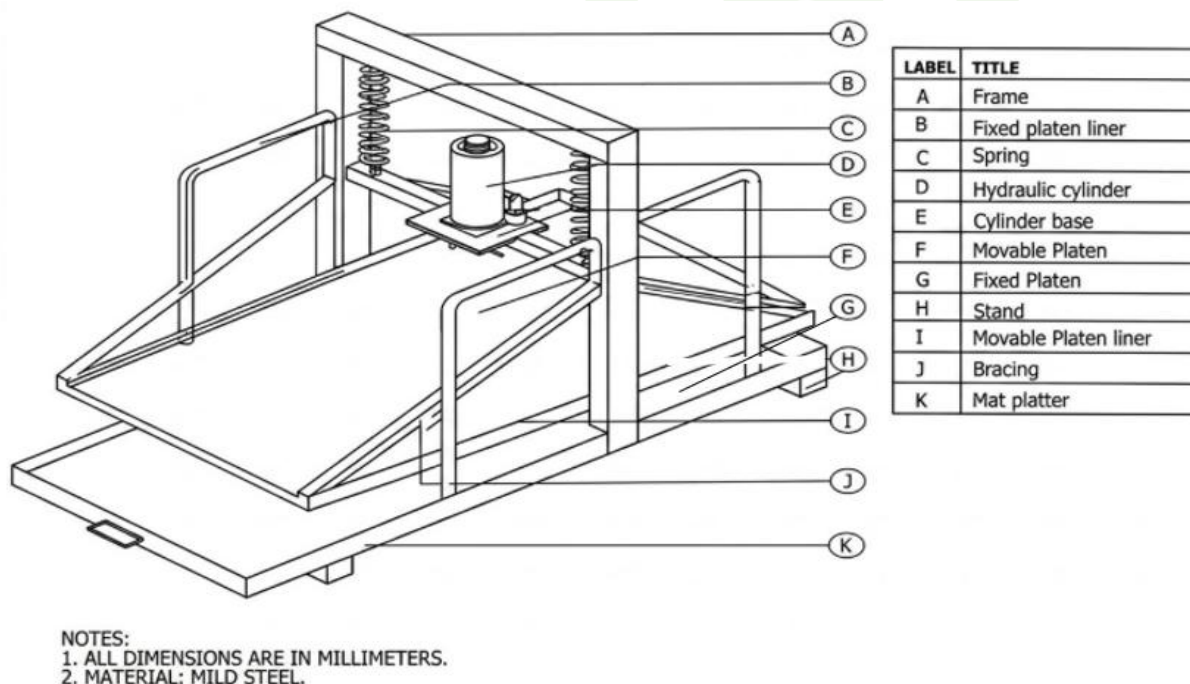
Assembly drawing of manual hydraulic particleboard compaction machine.
